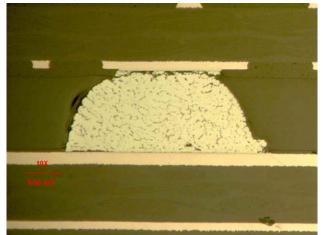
Cross-Section of a wbPBGA Solder Joint Failure for Unit 1 on Board 3, for Leg 13
